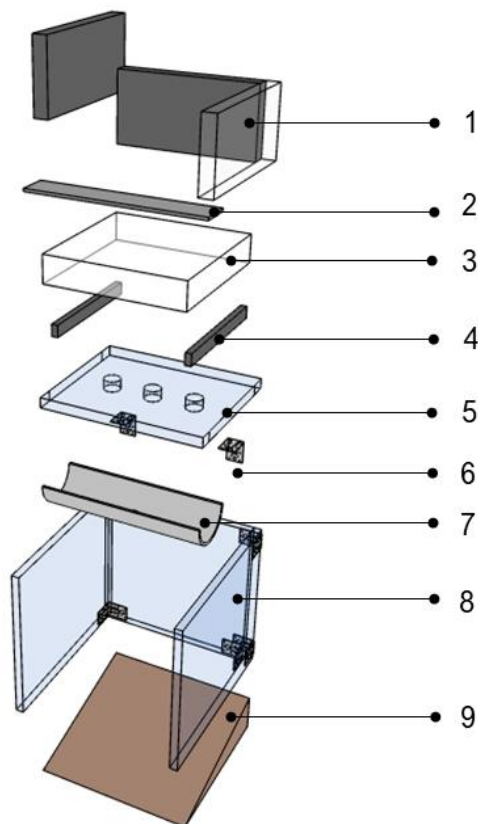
exploded view of a single exposure unit displaying the individual components.
